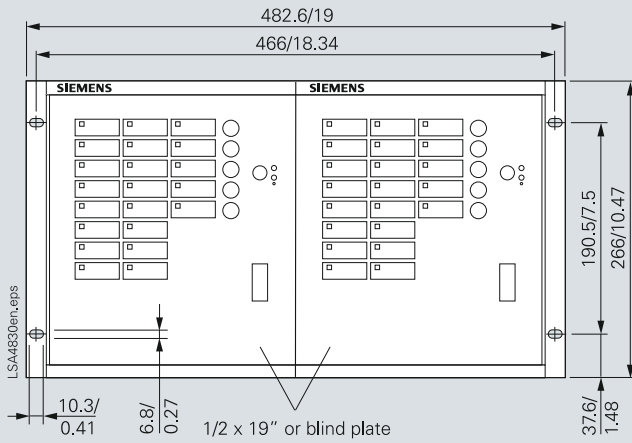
/13 7KE6100-0 SIMEAS R-PMU 19" frame mounting
